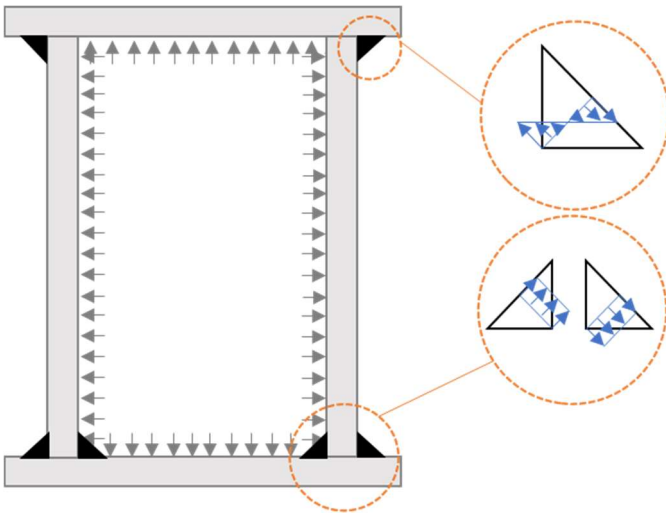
Internal pressure applying an additional bending load to the longitudinal fillet welds.
